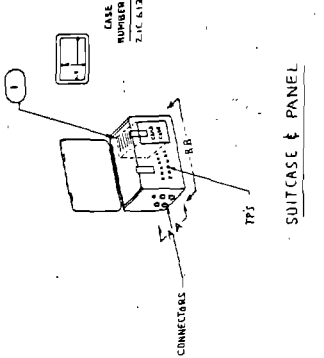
PROCESSOR, TOP ASSEMBLY (SHEET 2 OF 2) 113/114
